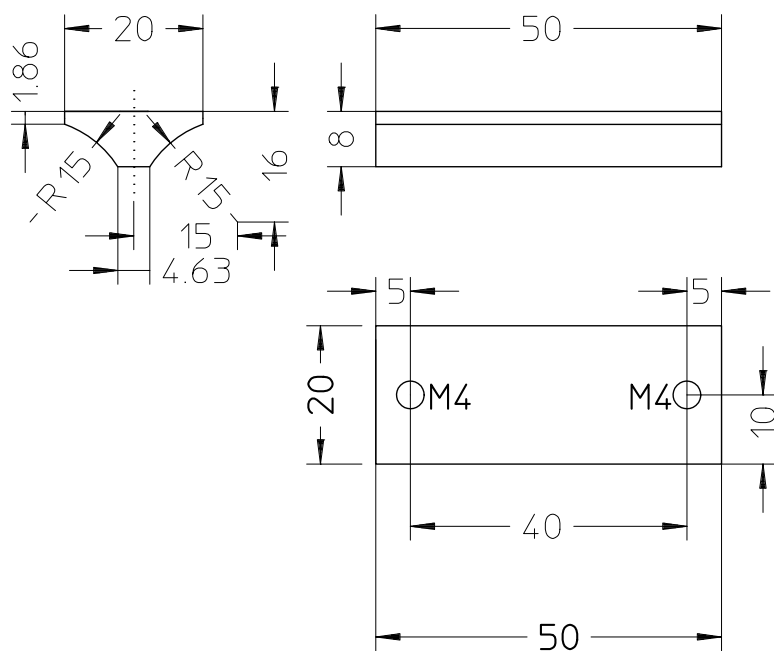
Top: mechanical drawing of the fixture piece that is glued onto this drift chambers to hold the CCD, mask or lens bars. Bottom: step for the CCD bar screwed to the top fixture piece to provide the correct distance in the Measurement Facility.
